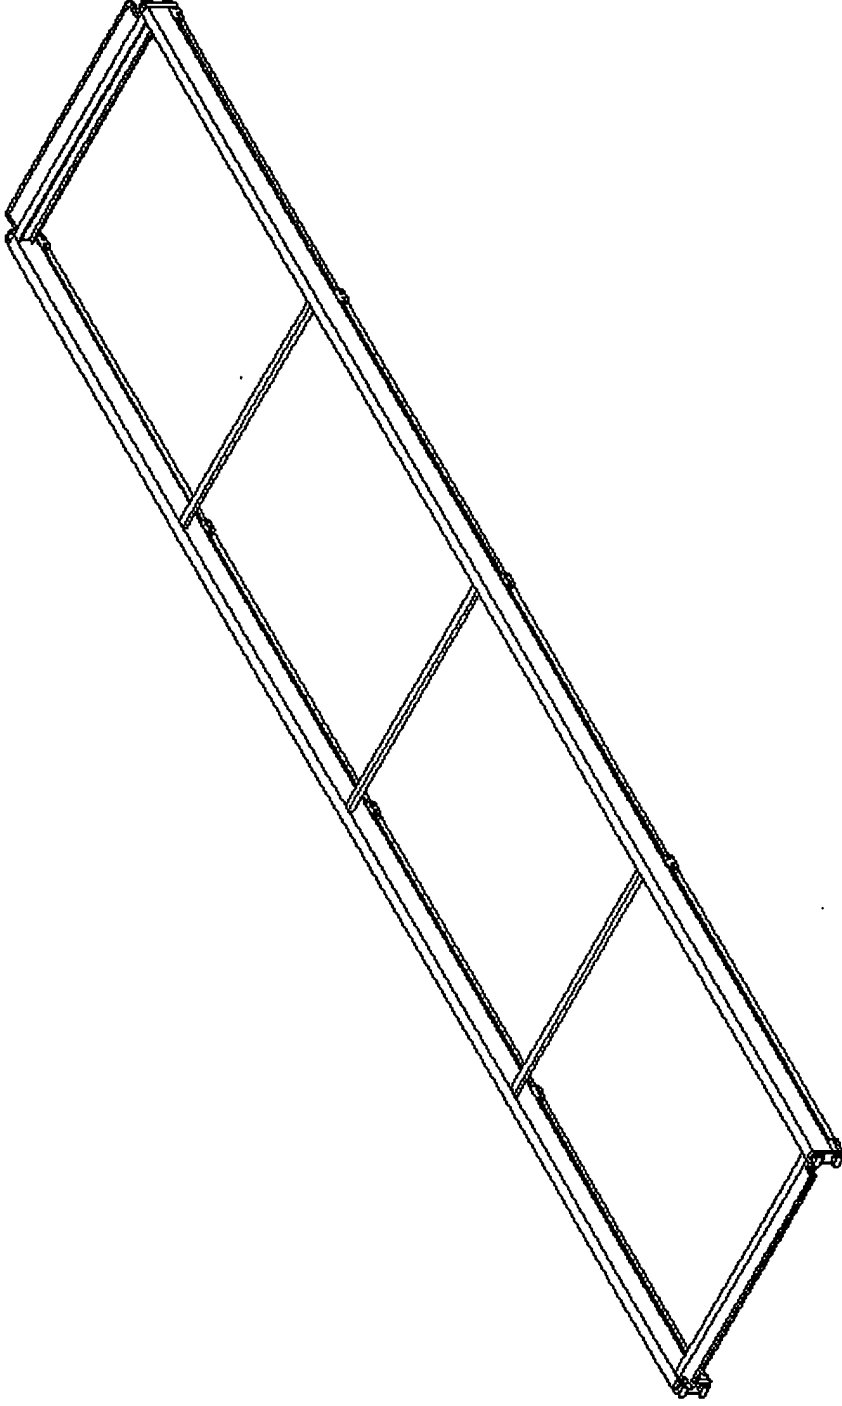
A: Isometric view of a ceiling frame (40 foot collapsible cargo container)
